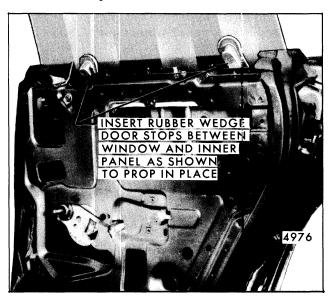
Use of Rubber Door Stop Wedges to Prop Window in Place
